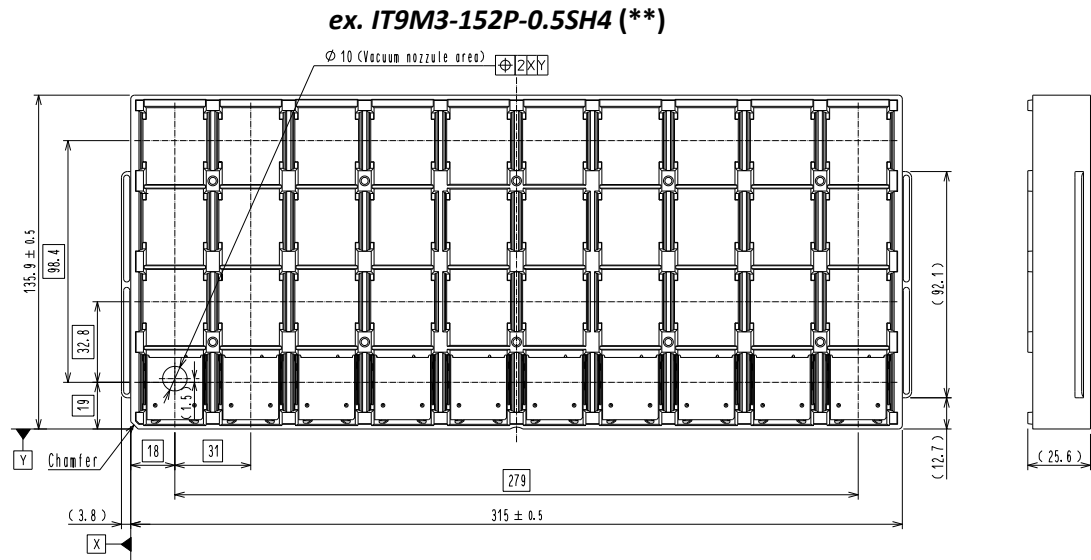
Hard Tray for IT9 Plug (dimensions in mm)
